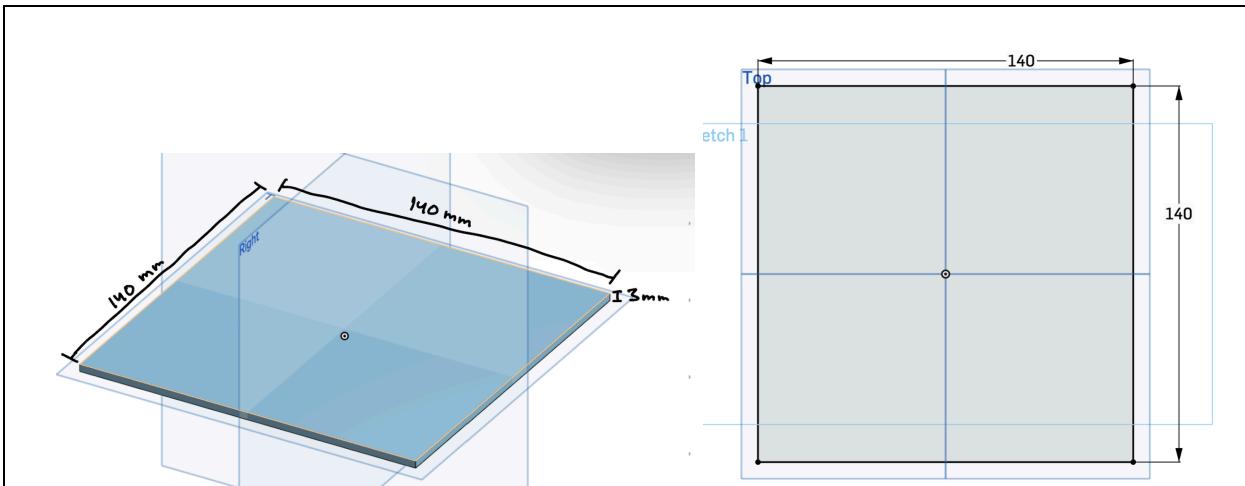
Spacer [LINK](#) - placed between motor and rotor board to keep it balanced.
